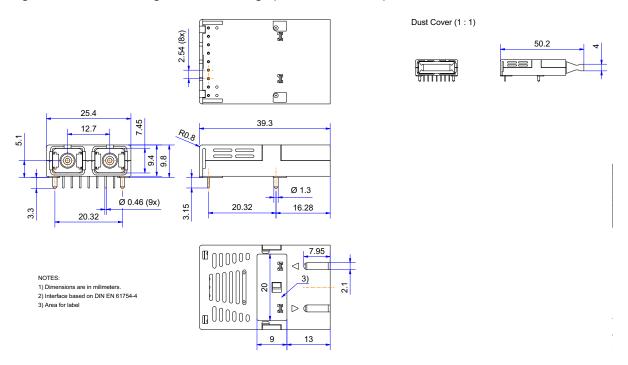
2 × 9 SC Package Outline Drawings (Dimensions in mm)
